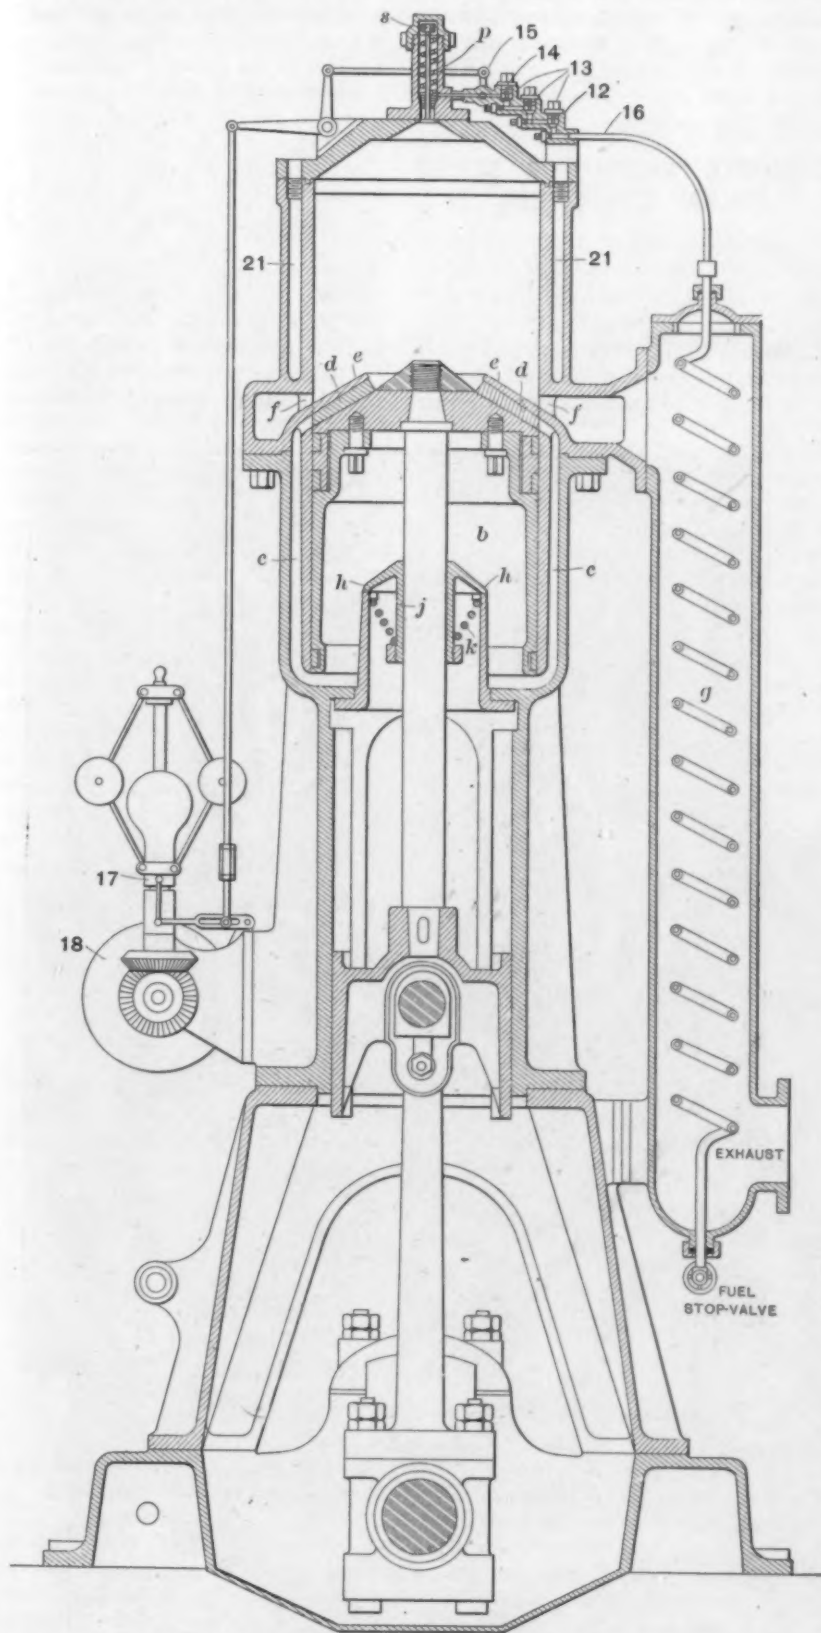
Two-cycle Fuel Oil Engine with Piston Down.
